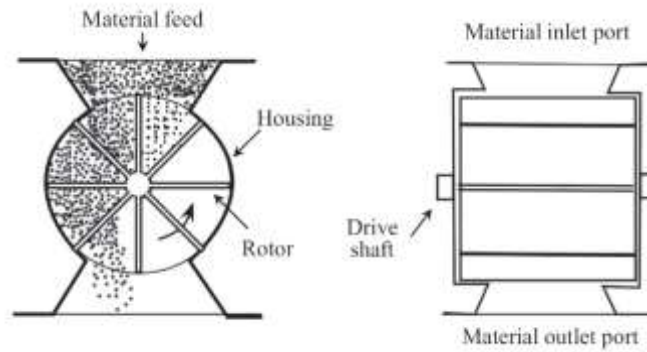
Drop-through rotary Valve (Mills, 2016)
